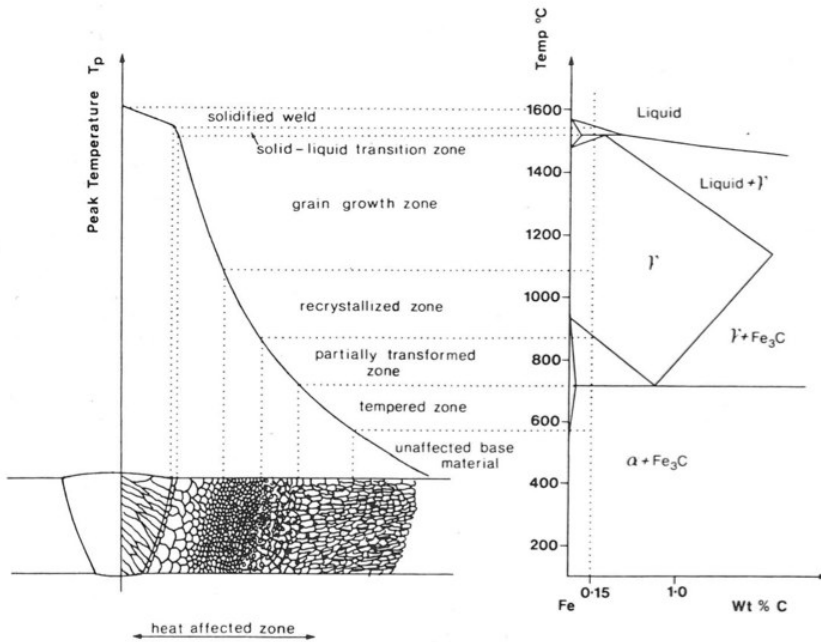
Weld zones in single-pass welds [10].
